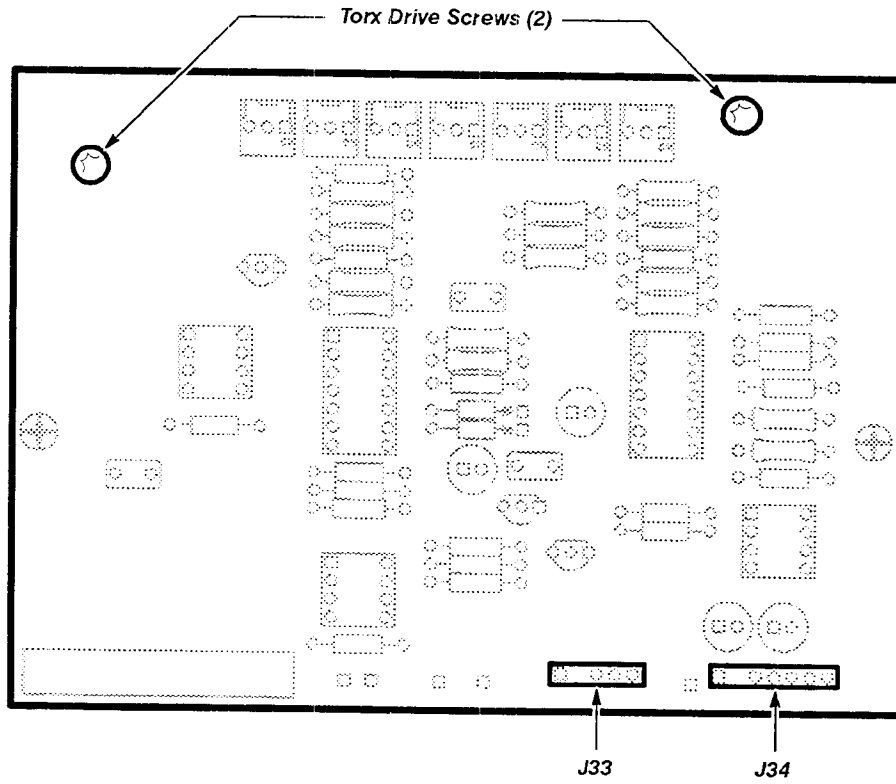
Removing/Replacing the A26 Geometry Board
